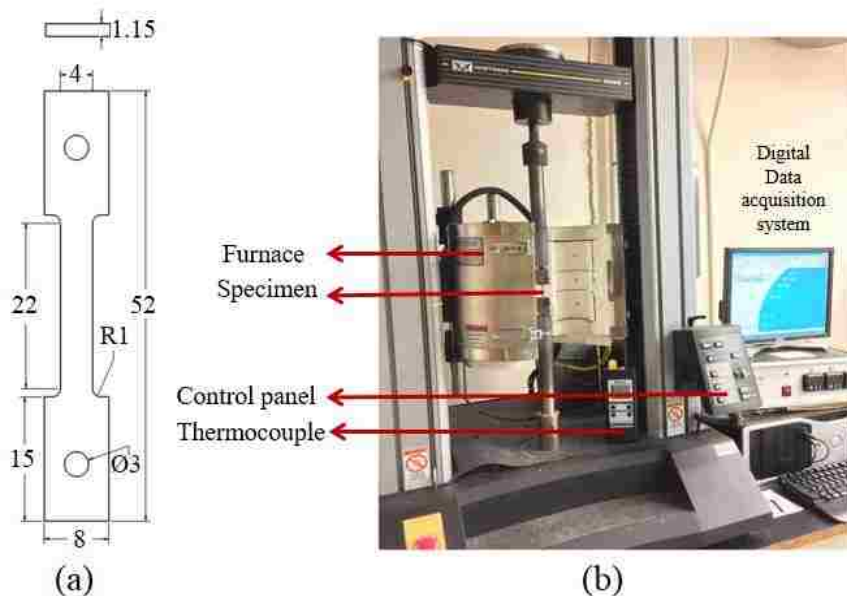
(a) Tensile test specimen geometry (dimensions are in mm). (b) Experimental setup.
